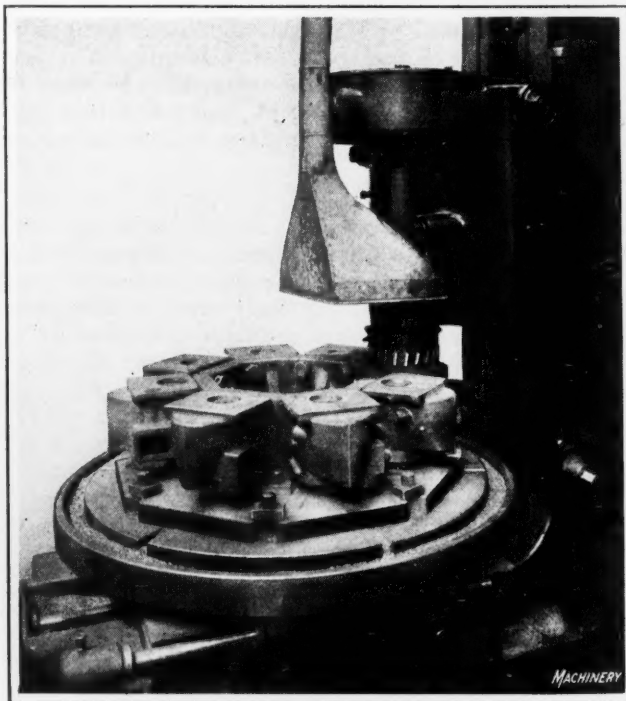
Twelve-inch Diameter Cutter with 30 Blades milling Cast Iron; Cutter Speed, 147 Feet per Minute; Table Travel, 43 Inches per Minute; Depth of Cut, $\frac{3}{16}$ Inch; Cutting Time, 30 Seconds; Castings per Grind of Cutter, 450
